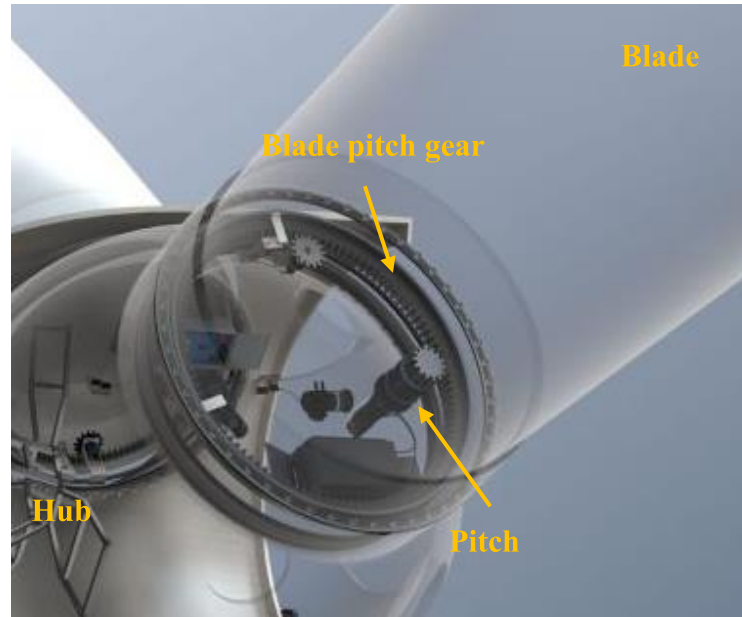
Electric pitch drive [11]. By rotating, the motor moves the external gear mounted at blade root.
